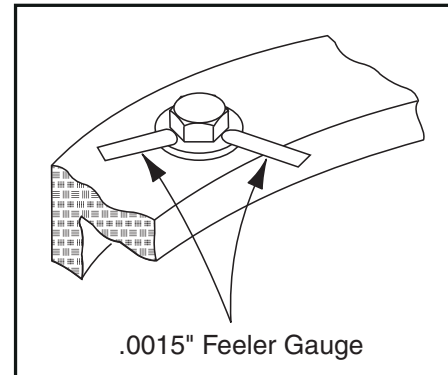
Swing Bearing Bolt Feeler Gauge Check
